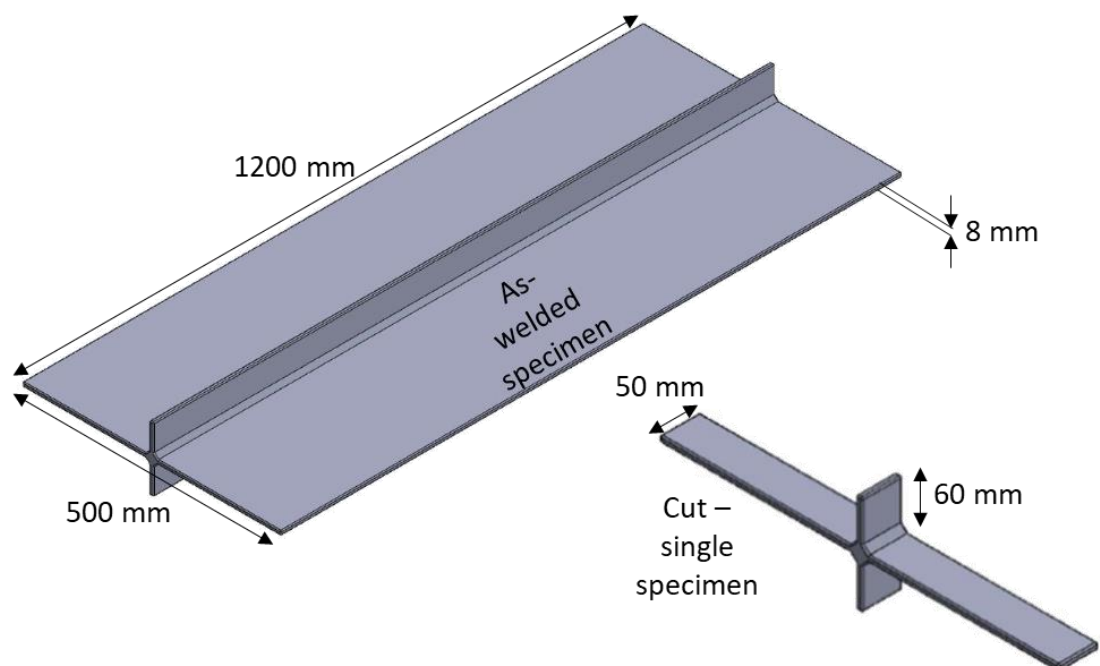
Schematic of a MAG welded-joint after welding and a specimen extracted after welding.
